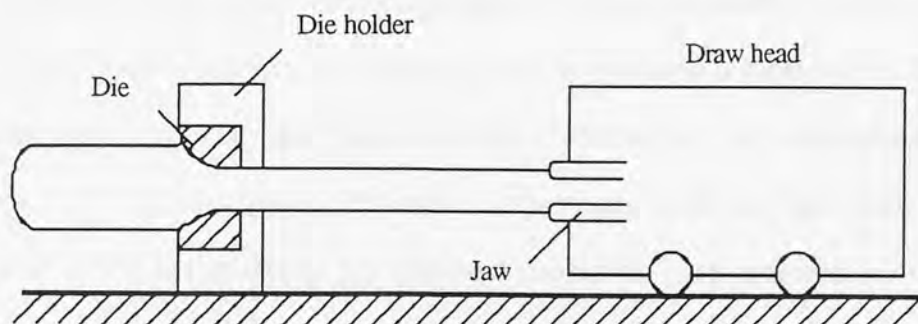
Schematic drawing of a drawbench, after Dieter [11].
